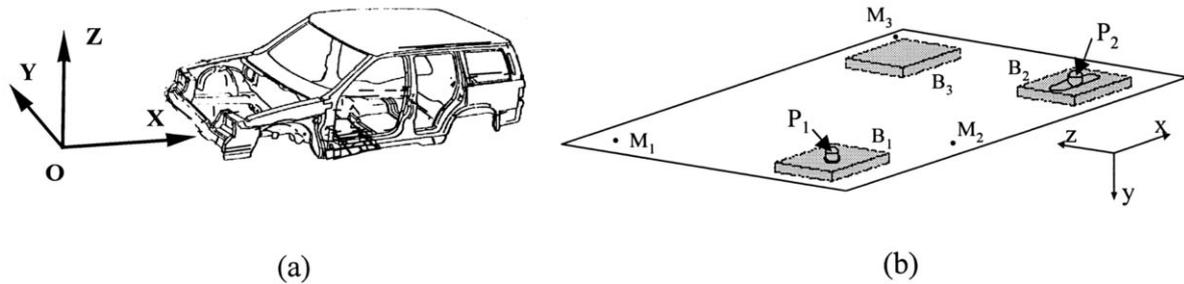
Automotive body and its assembly fixture: (a) body coordinate system; (b) 3-2-1 fixturing principle for rigid part
